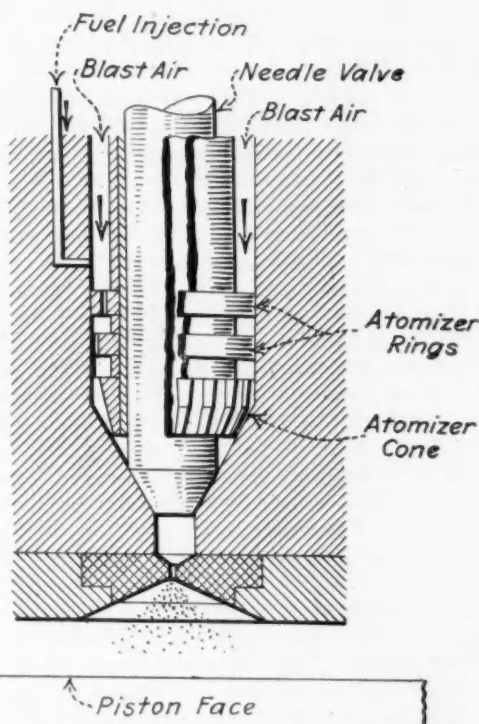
CLOSED NOZZLE TYPE FUEL VALVE
